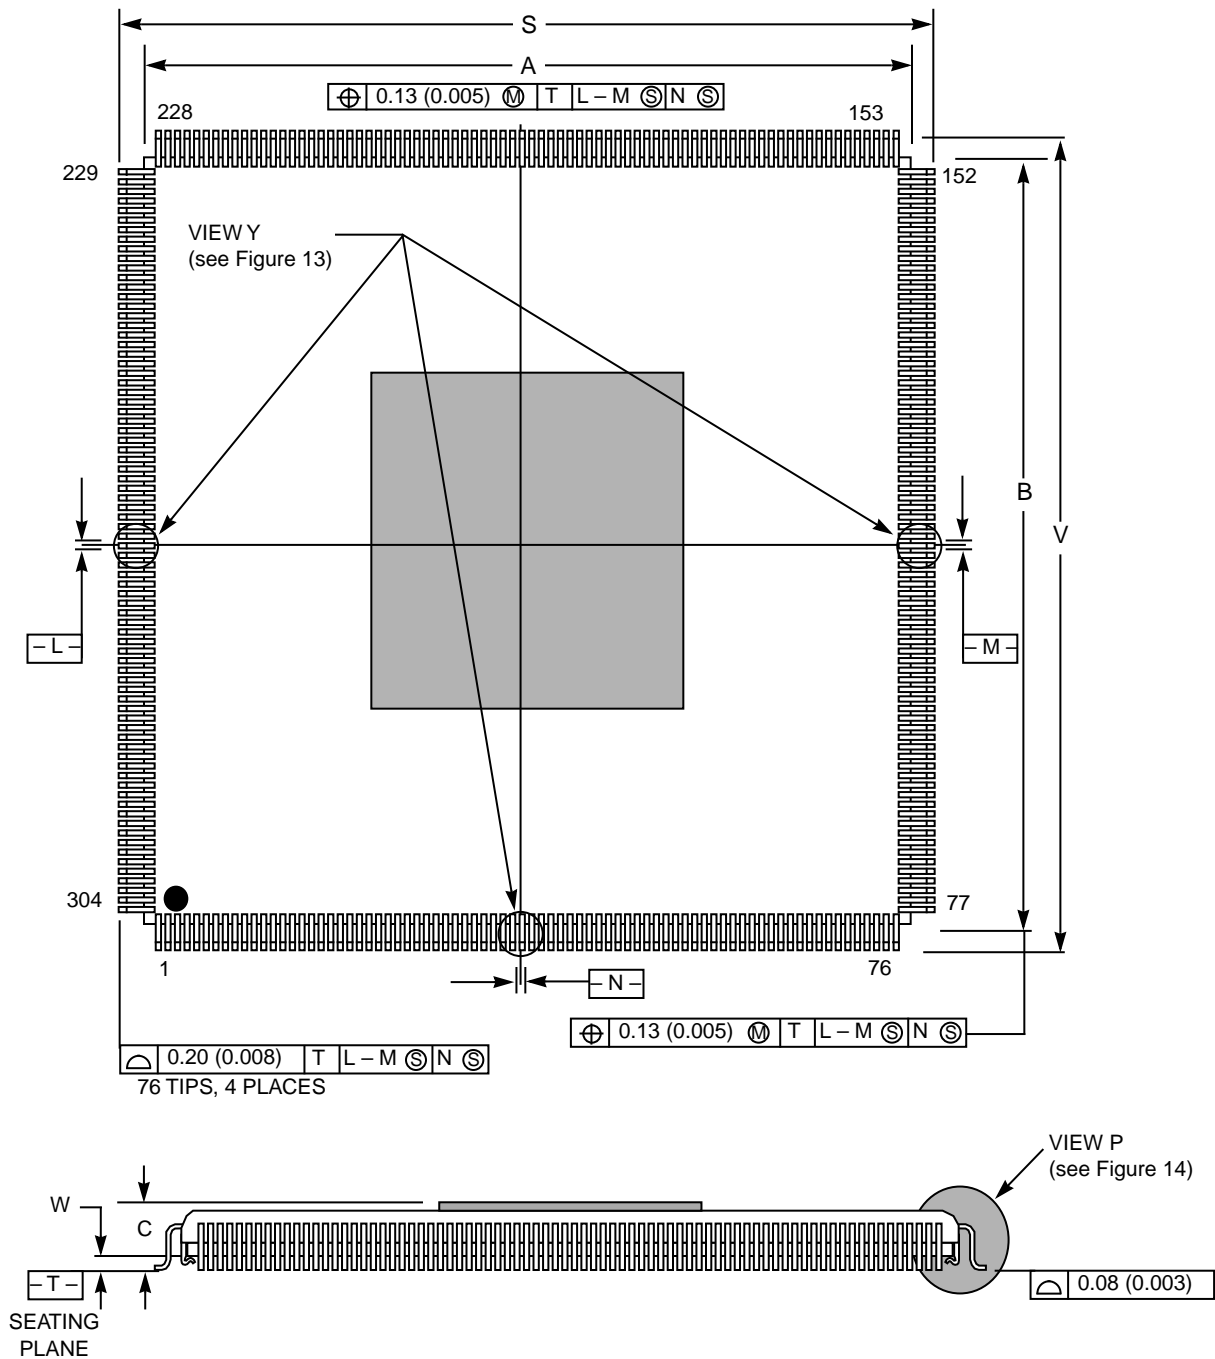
Mechanical Dimensions of the IBM C4-CQFP Package
